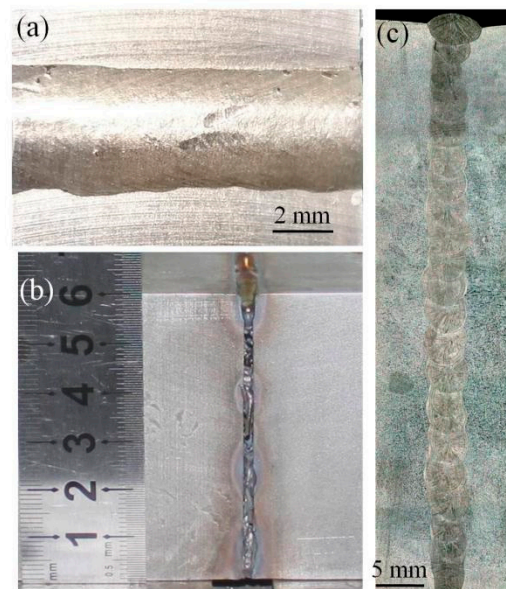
(a) Appearance of the welding joints between two stainless steel plates with the thickness of 60 mm, (b) picture of the welding sample, and (c) section of the ultra-narrow gap welding joint.
